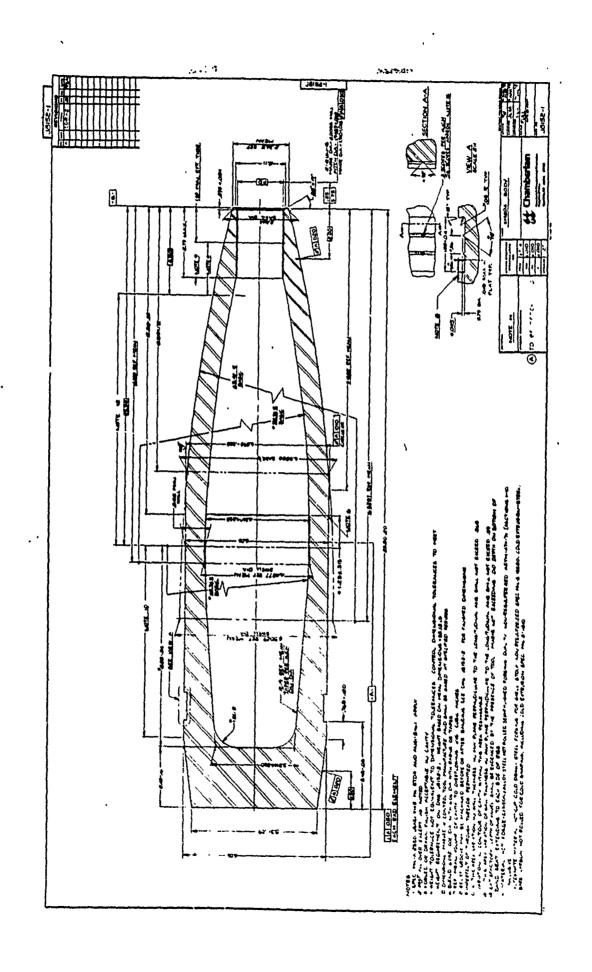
on the following page shows a "heavy-wall," 155-mm XM804 Projectile Body design which was completed during this program. Also completed were the associated body assembly design and the projectile marking diagram which are shown by Drawing Nos. J8152-2 and -3, respectively, on Pages 7 and 8. An exterior ballistics study was performed on the heavy-wall, 155-mm, XM804 Projectile design described above and the standard 155-mm, M107 Projectile. This study was based on the "Engineering Handbook for Control of Projectile Flight Characteristics" (AMCP Pamphlet No. 706-242). Tabulated below are the data from this study:
